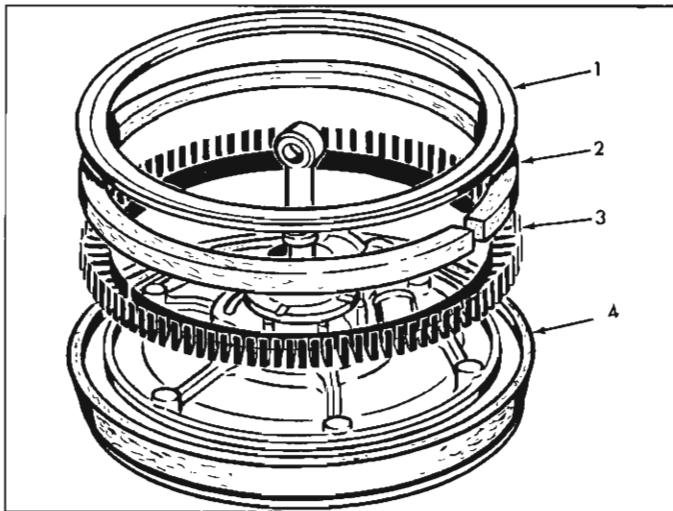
Removal of Felt Retainer, Felt and Expanding Ring from Piston Assembly
